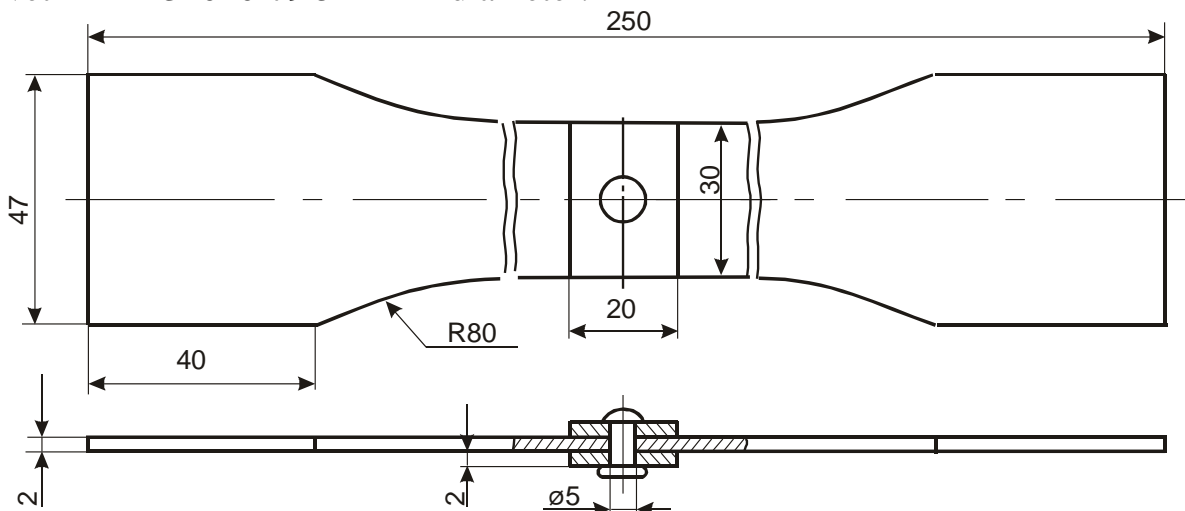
Test-pieces of plates of Д16АТл2 sheet with unloaded hole filled with rivets-11 OCT1 34040-79
